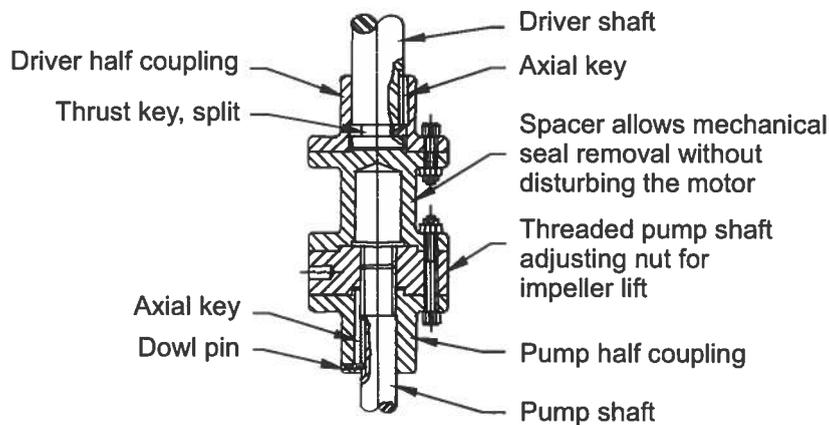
Flanged adjustable spacer coupling, rigid style
